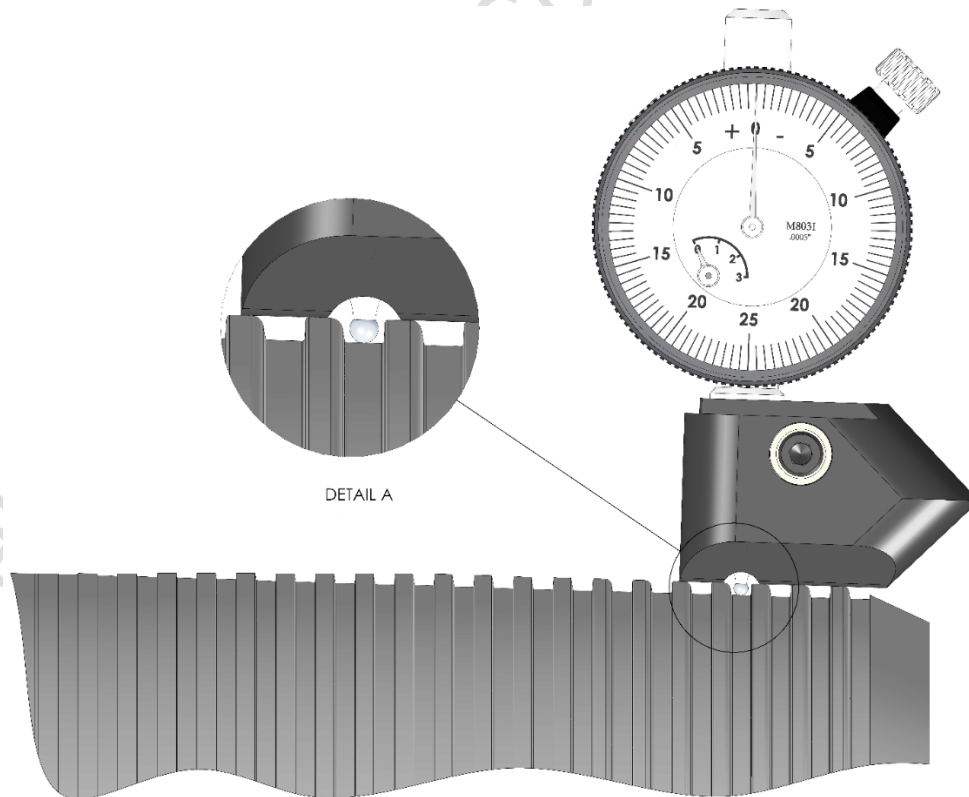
External Thread Height Gauge on Pin Threads (Buttress Thread Height Gauge)
